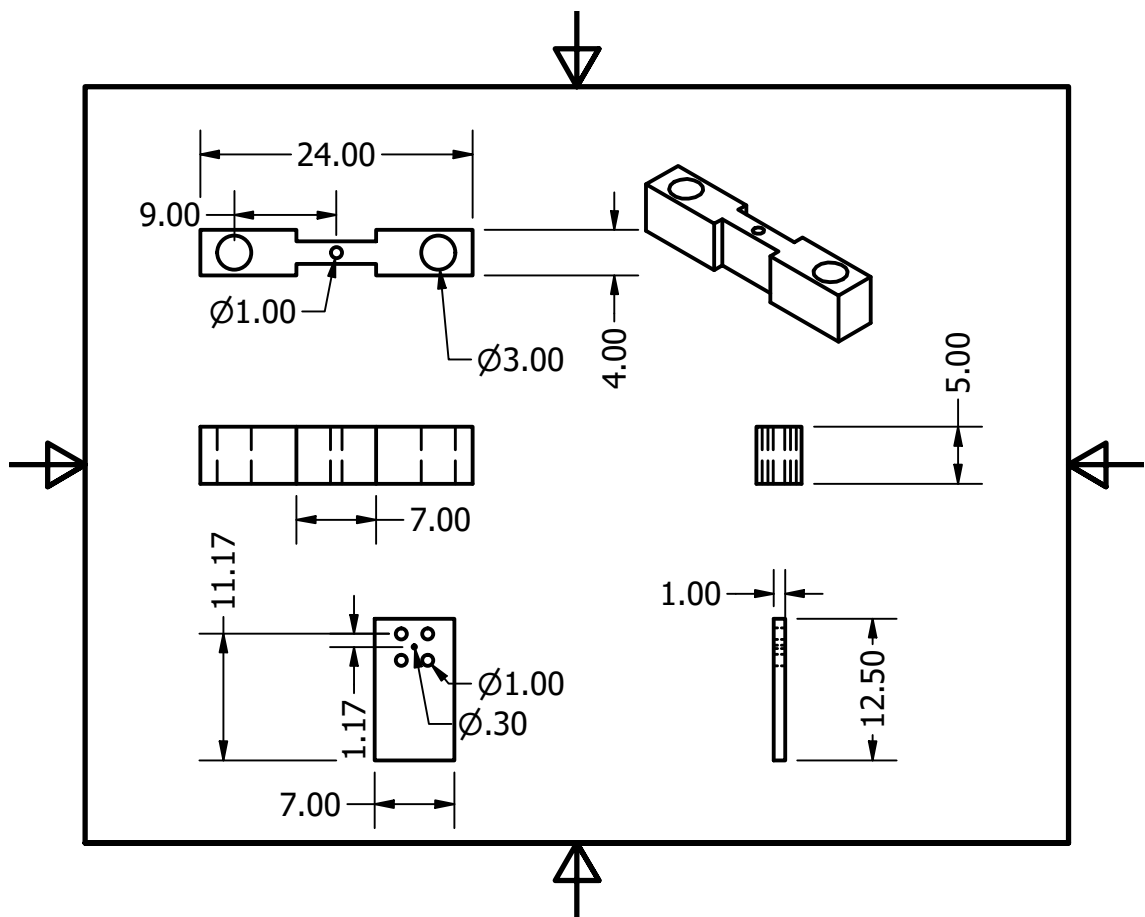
The drawing of the trap with large endcap separation. The trap is comprised of ceramic pieces and piece holders. The first two rows show the dimensions of the piece holders and the third row shows the dimension of the designed pieces. All of the labelled sizes are with mm unit.
